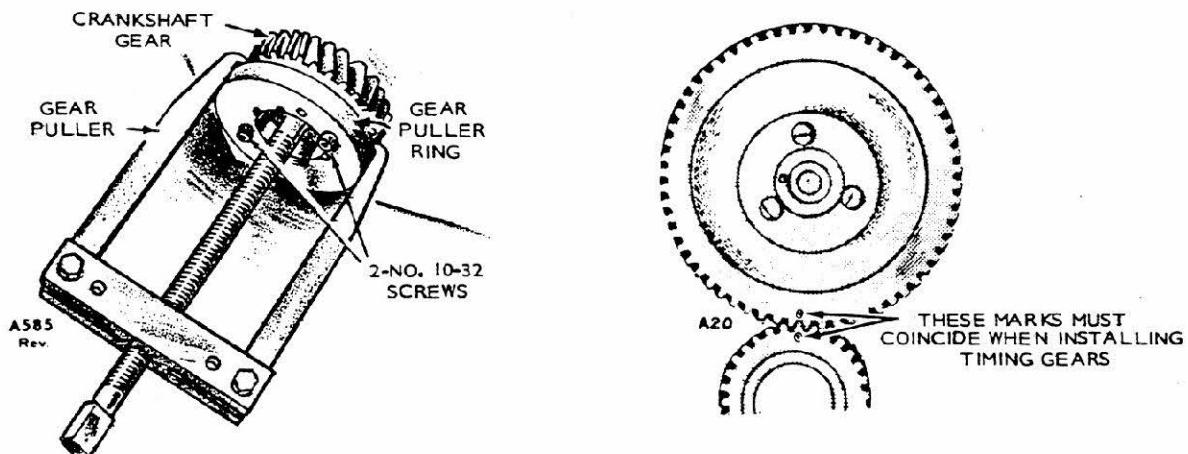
TIMING GEAR REMOVAL AND INSTALLATION
